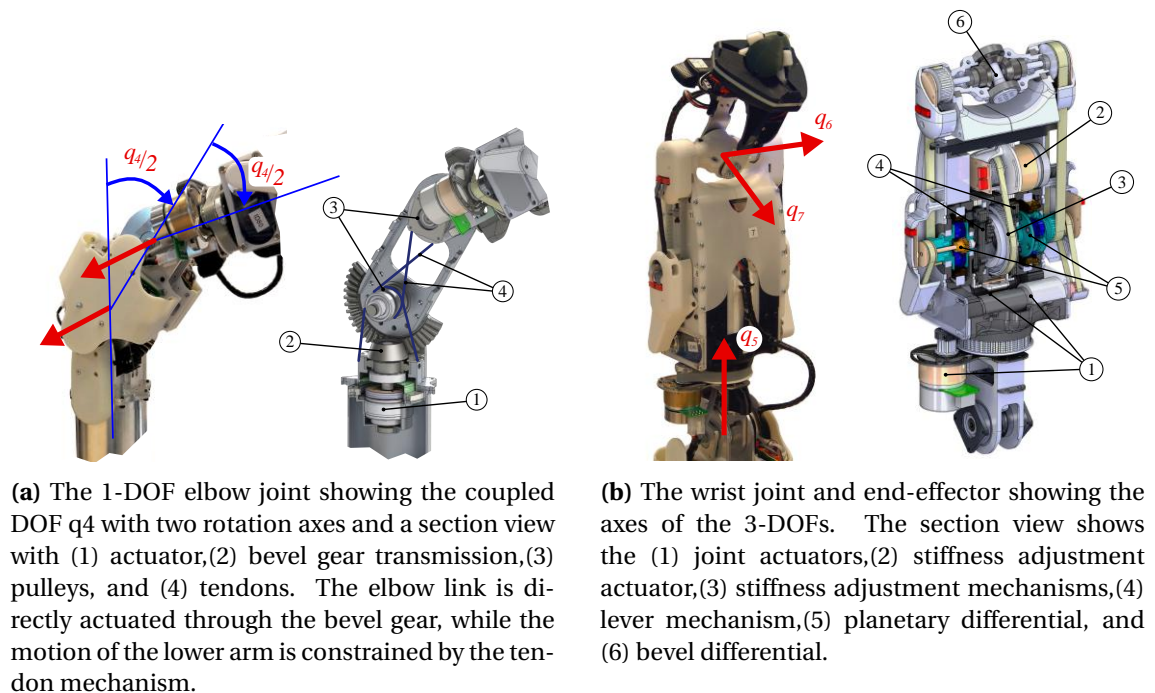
CAD drawing of the elbow and wrist (Barrett et al., 2016).
